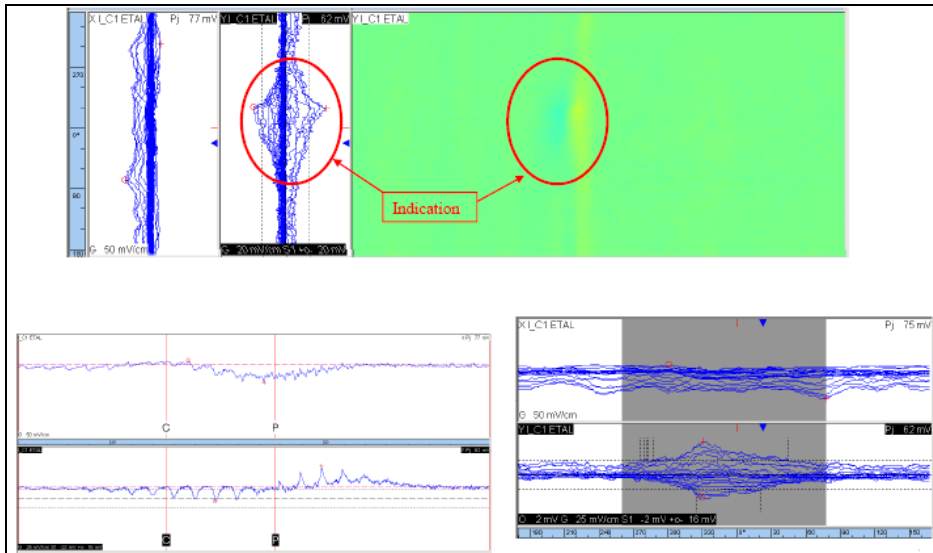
SG tube inspection using a rotating probe: examples of ET signals
